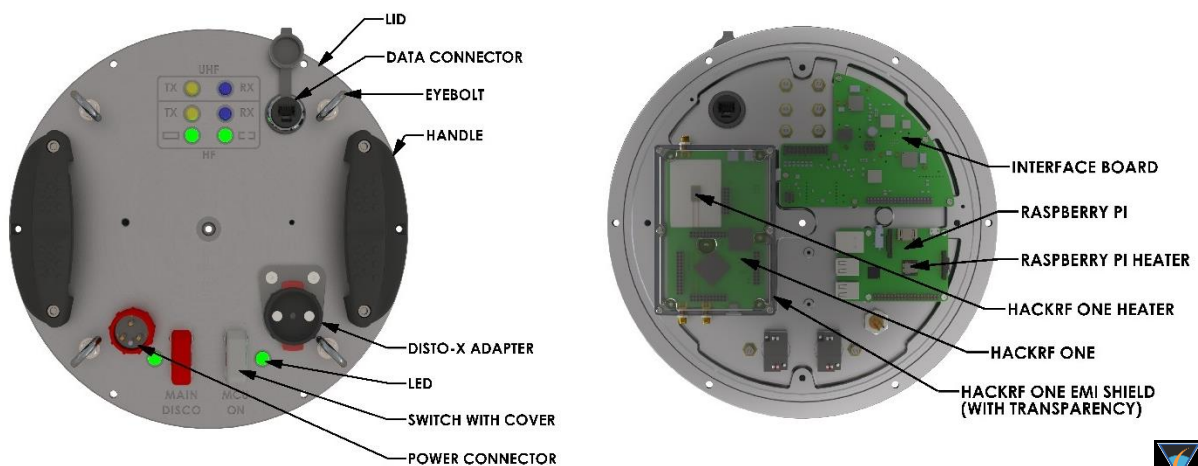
View of the top and bottom surfaces of the Lid and Electronics Assembly with component labels
